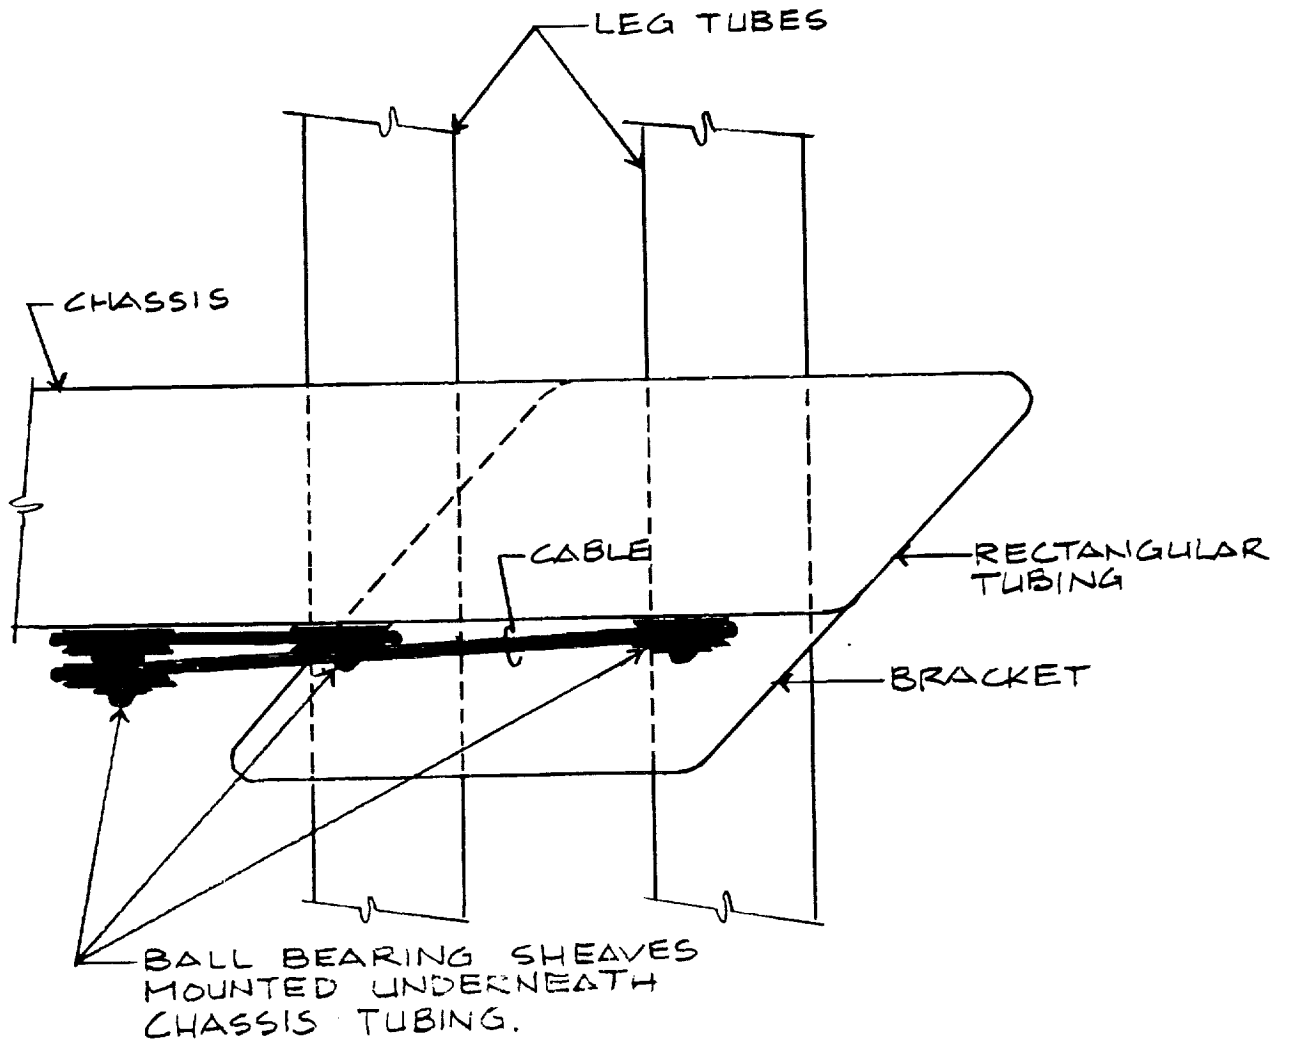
BALL BEARING SHEAVE MOUNTING (FRONT VIEW)
